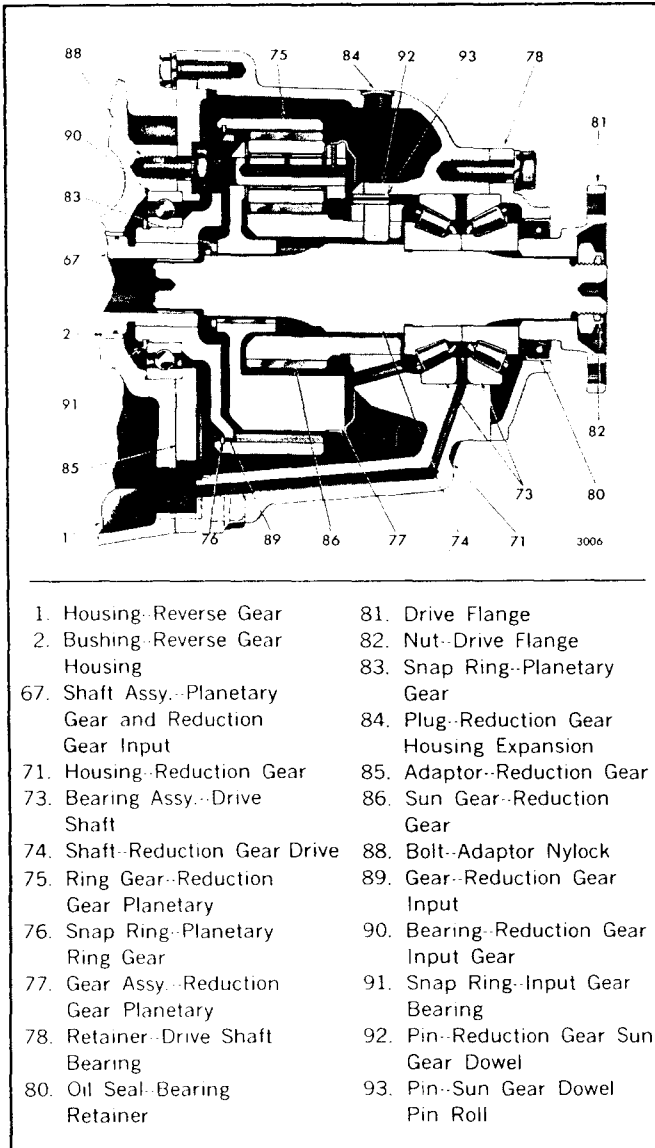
Reduction Gear Assembly (1.5:1 Ratio)
